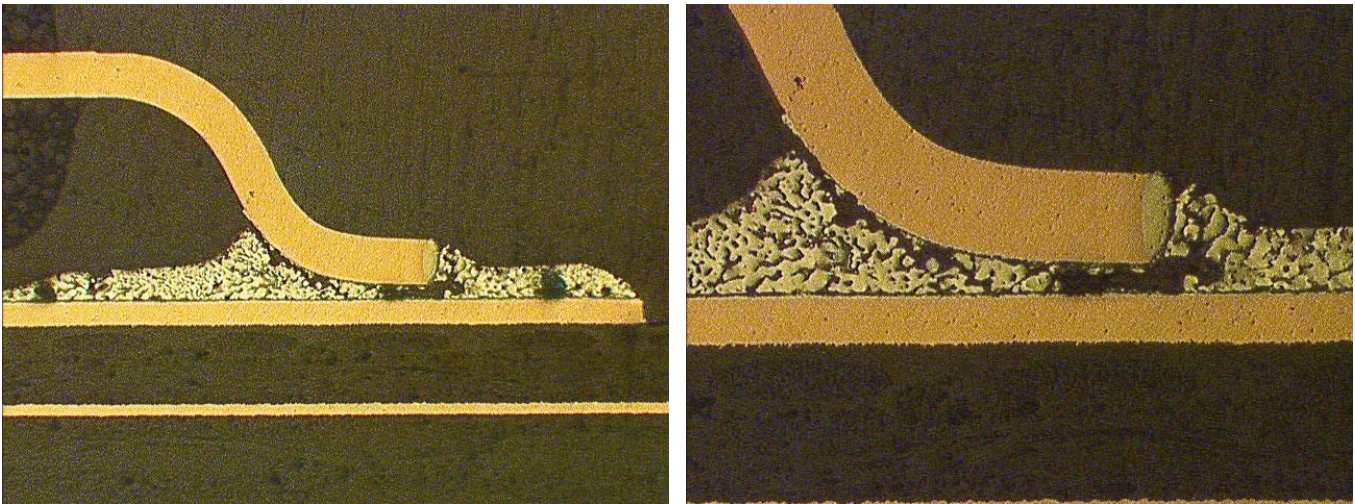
TQFP-144 Solder Joints, Board 127, Component U3, SnPb/NiPdAu, Failed @ 1744 Cycles
